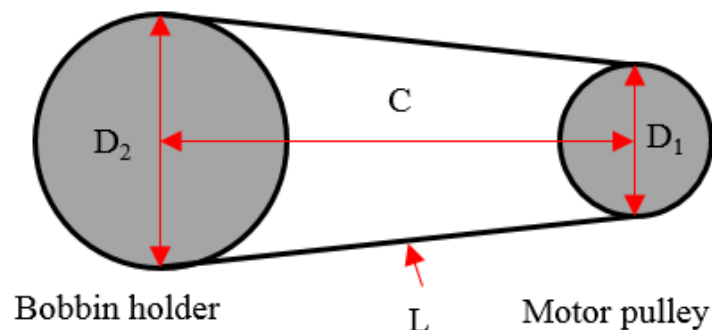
Schematic diagram of bobbin holder and motor pulley
